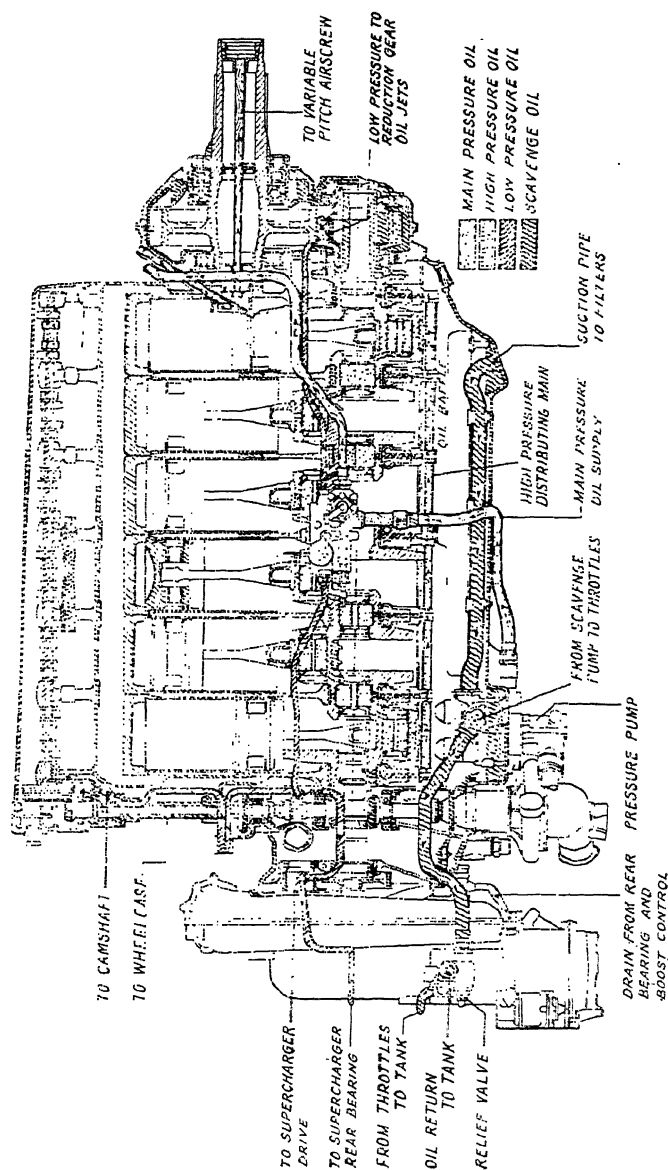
The Rolls Royce "Merlin" engine lubrication system, in side sectional view.
